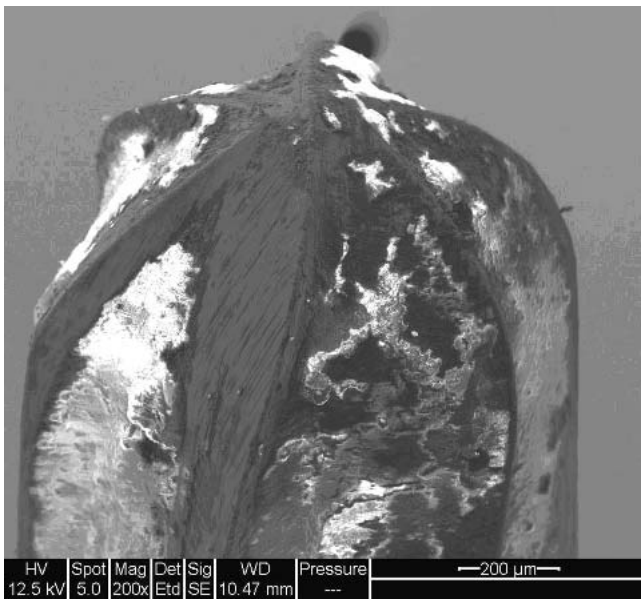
Magnified image of the cutting tool showing cutting edges and adhered bone material
